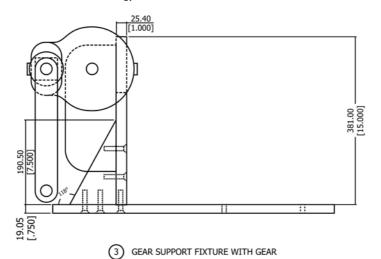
Sheet 2A—Gear Support Fixture With Gear
